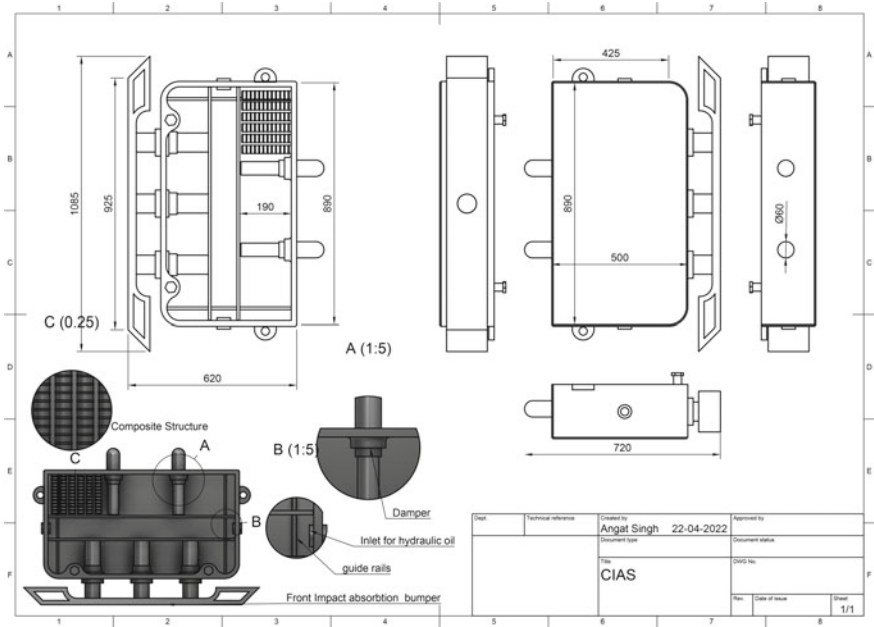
Technical drawing of the system (all dimensions are in mm)
